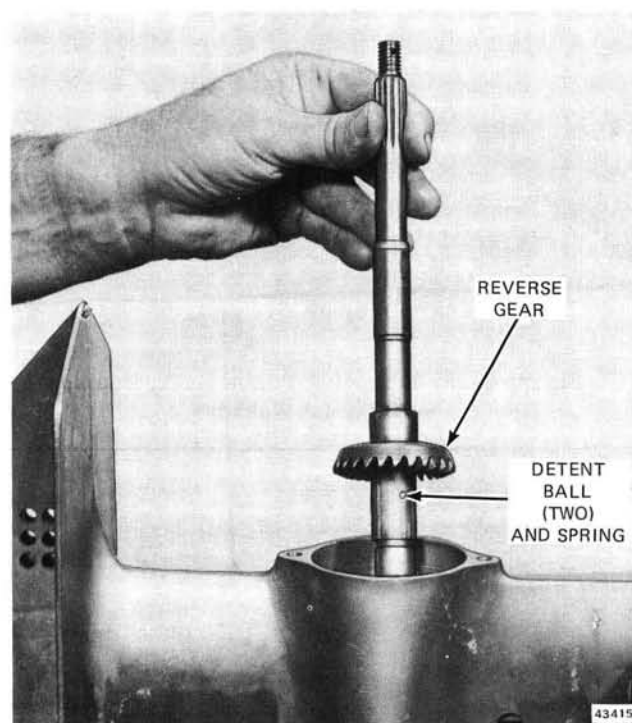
Removing Propeller Shaft and Reverse Gear
